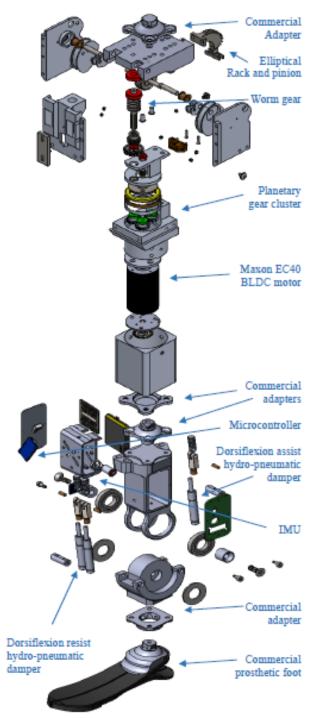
EXPLODED VIEW OF THE RPL PROTOYPE
